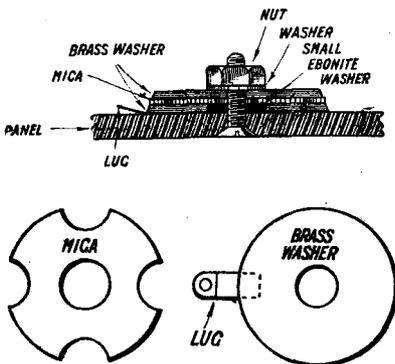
The upper drawing shows the assembly of the spark gap, while the lower one indicates details of the mica and brass washers.
